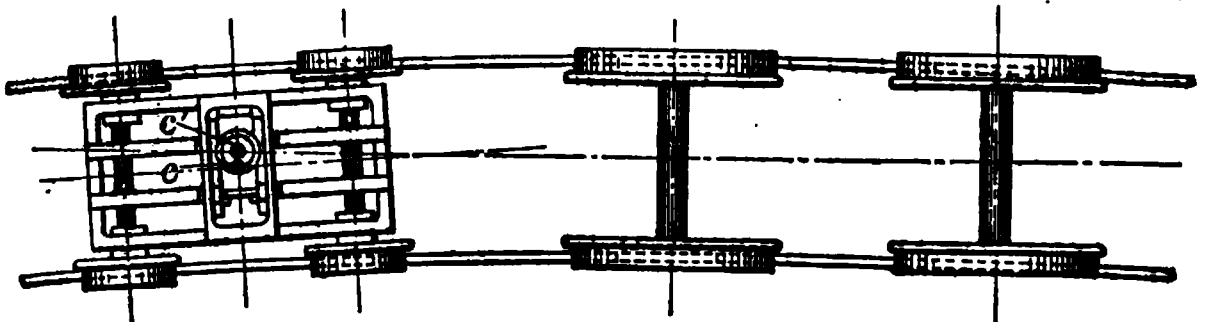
FOUR-WHEELED TRUCK—SHIFTING CENTER.
